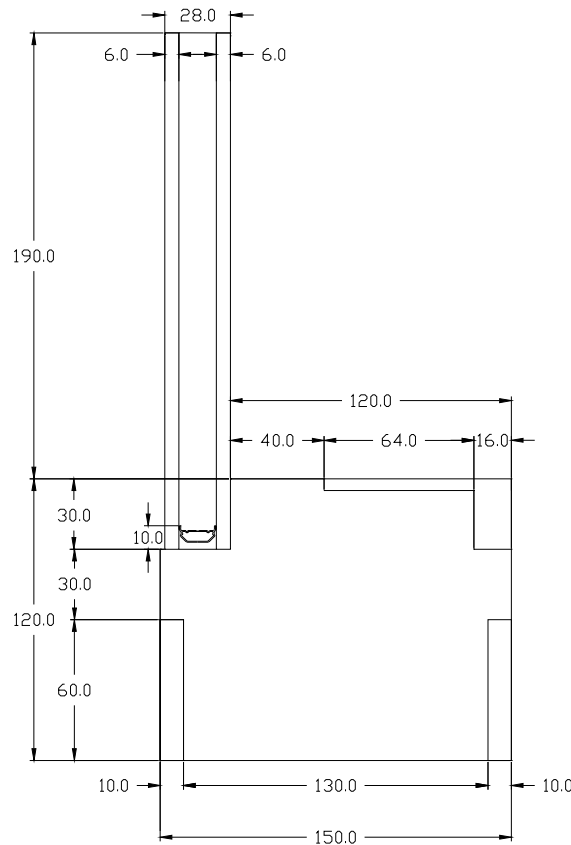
Dimensioned drawing of the spacer and frame in millimeters.
